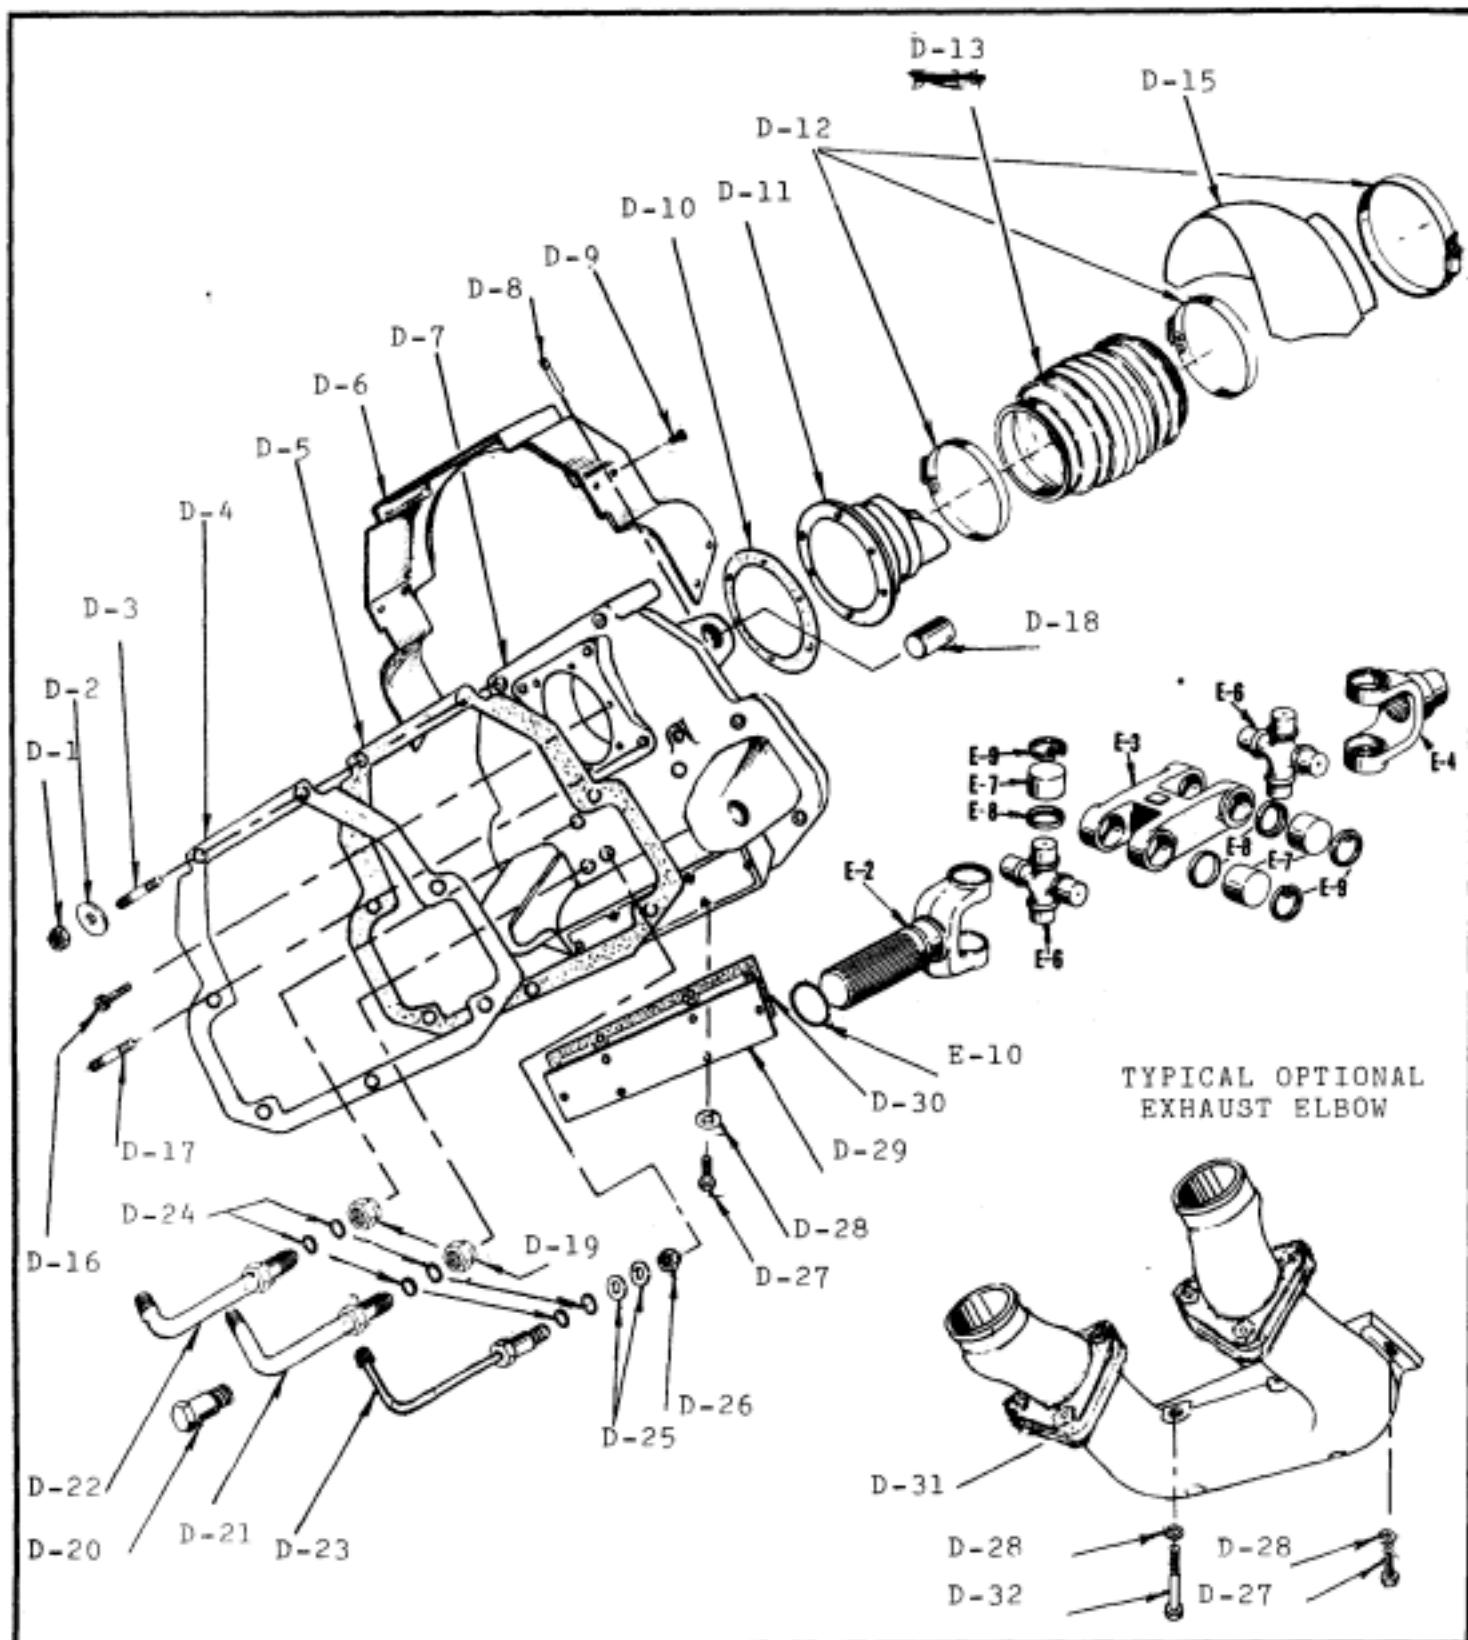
TRANSCOM HOUSING AND UNIVERSAL JOINT ASSEMBLIES
